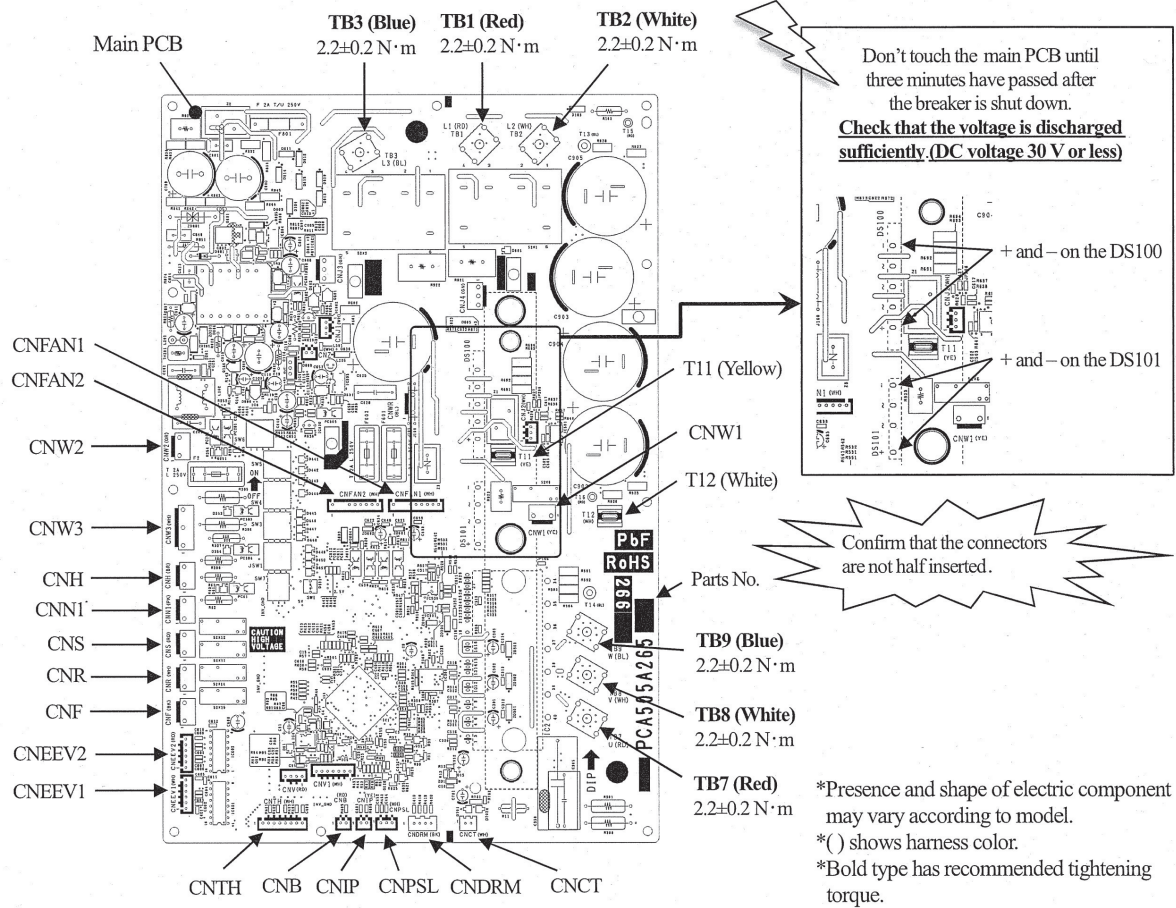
Parts arrangement view of main PCB and voltage measurement points
